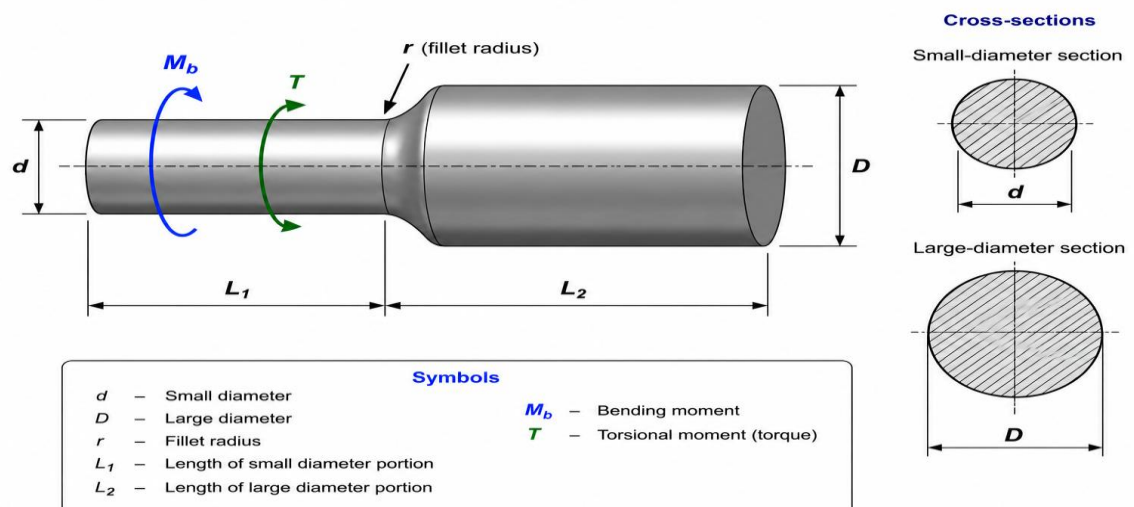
Geometry, dimensional parameters, and loading of the filleted stepped shaft.
